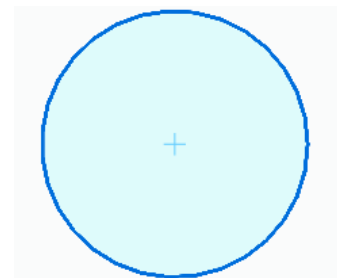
Circle drawn using the Circle by Center Point tool
